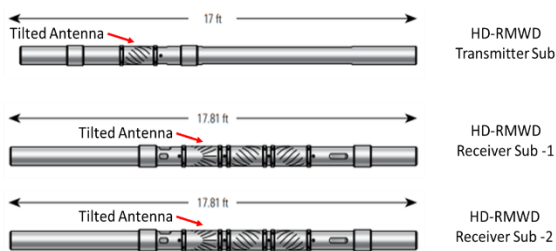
HD-RMWD transmitter and receiver sub sketches showing tool dimensions [Error! Reference source not found.].
